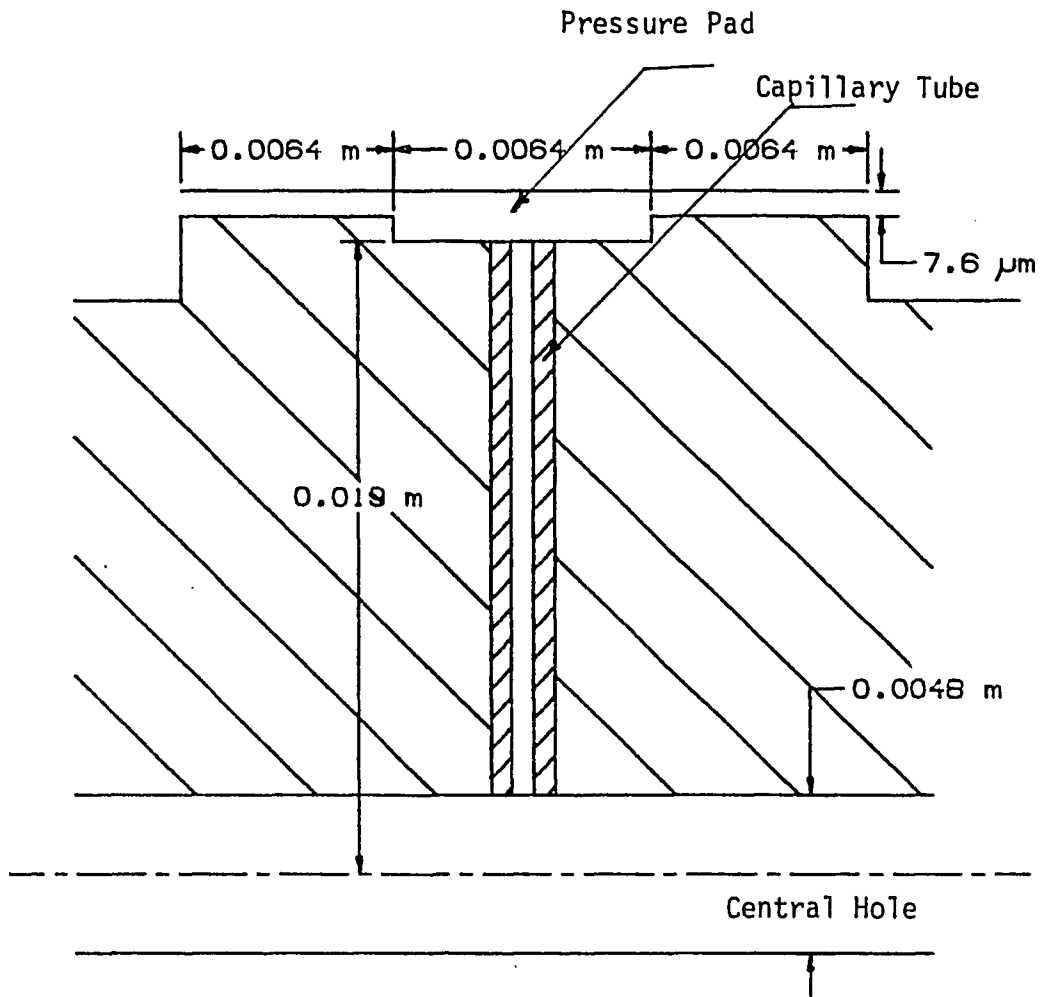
Cross Section of Hydrostatic Bearing Through a Capillary Tube
